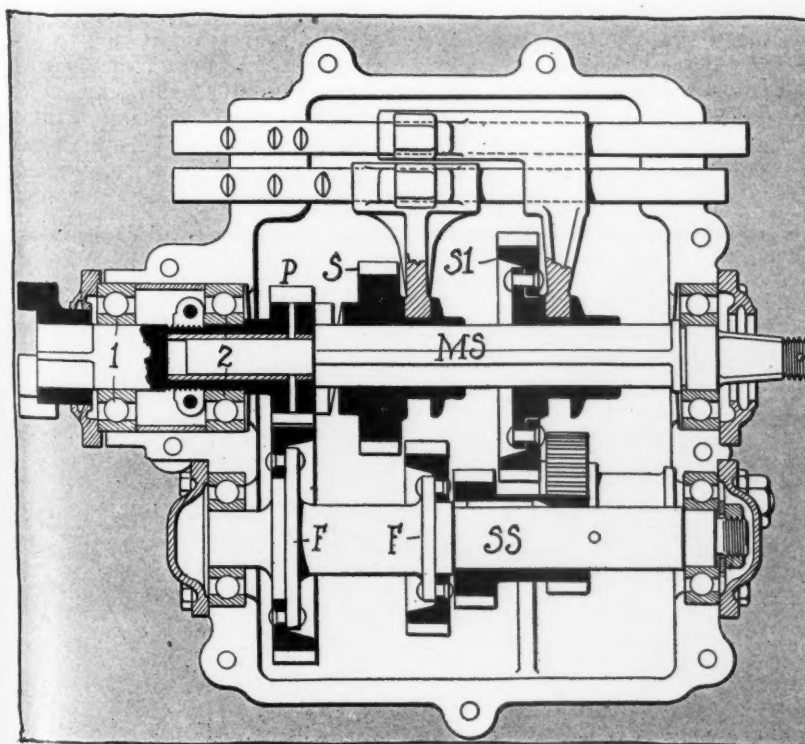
HORIZONTAL PLAN AND SECTION PREMIER GEARSET
